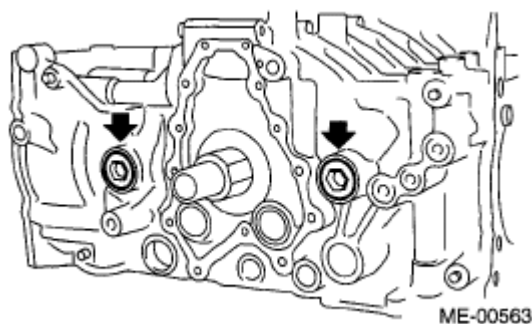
Locating Service Hole Cover And Service Hole Plugs
